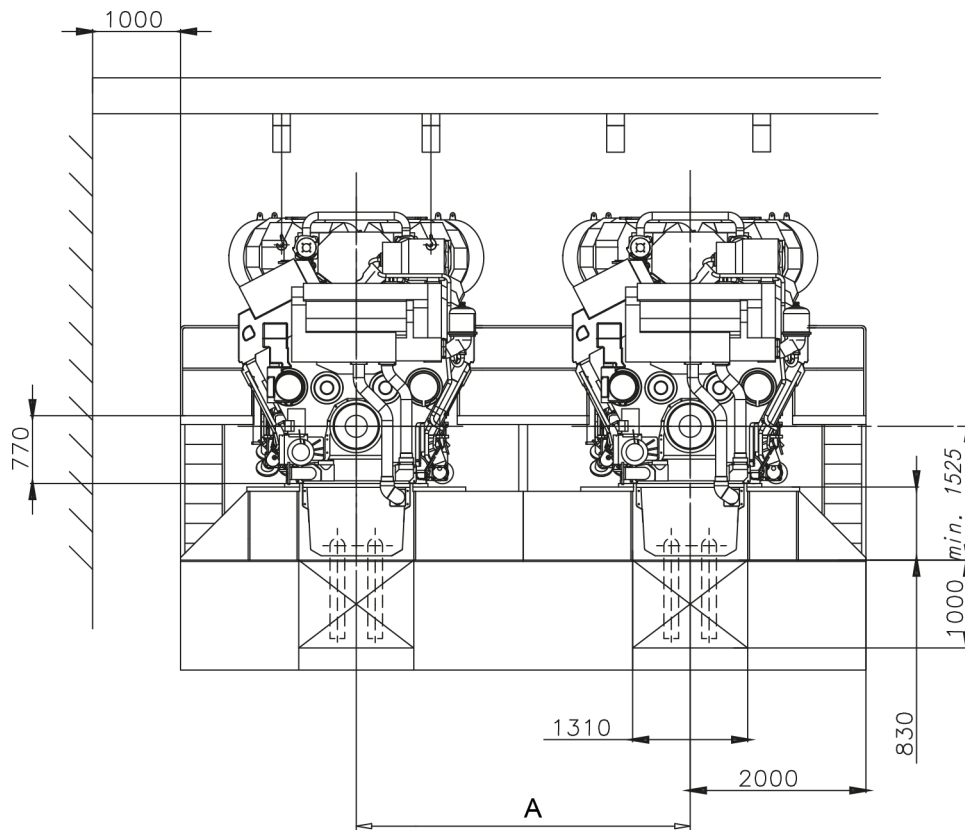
Crankshaft distances, V-engines (DAAF073294)
